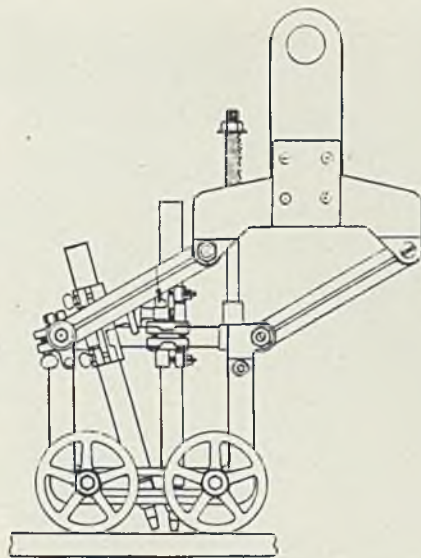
Plate-riding device with floating blowpipe mechanism set up for square cutting and beveling
